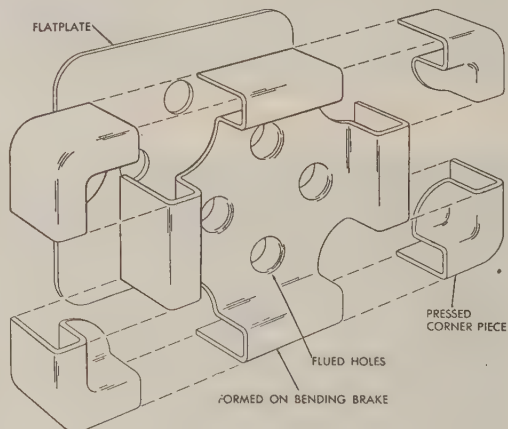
EXPLODED VIEW OF WATER-COOLED FURNACE DOOR SHOWING CONSTRUCTION
